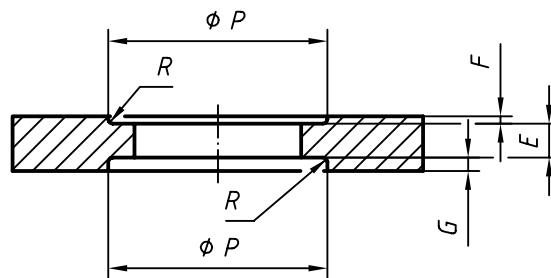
Grinding wheel recessed on both sides, e.g. as specified in ISO 603-1
